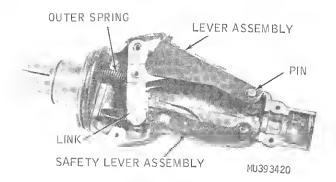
Installing ignition lever assembly and safety lever assembly.
